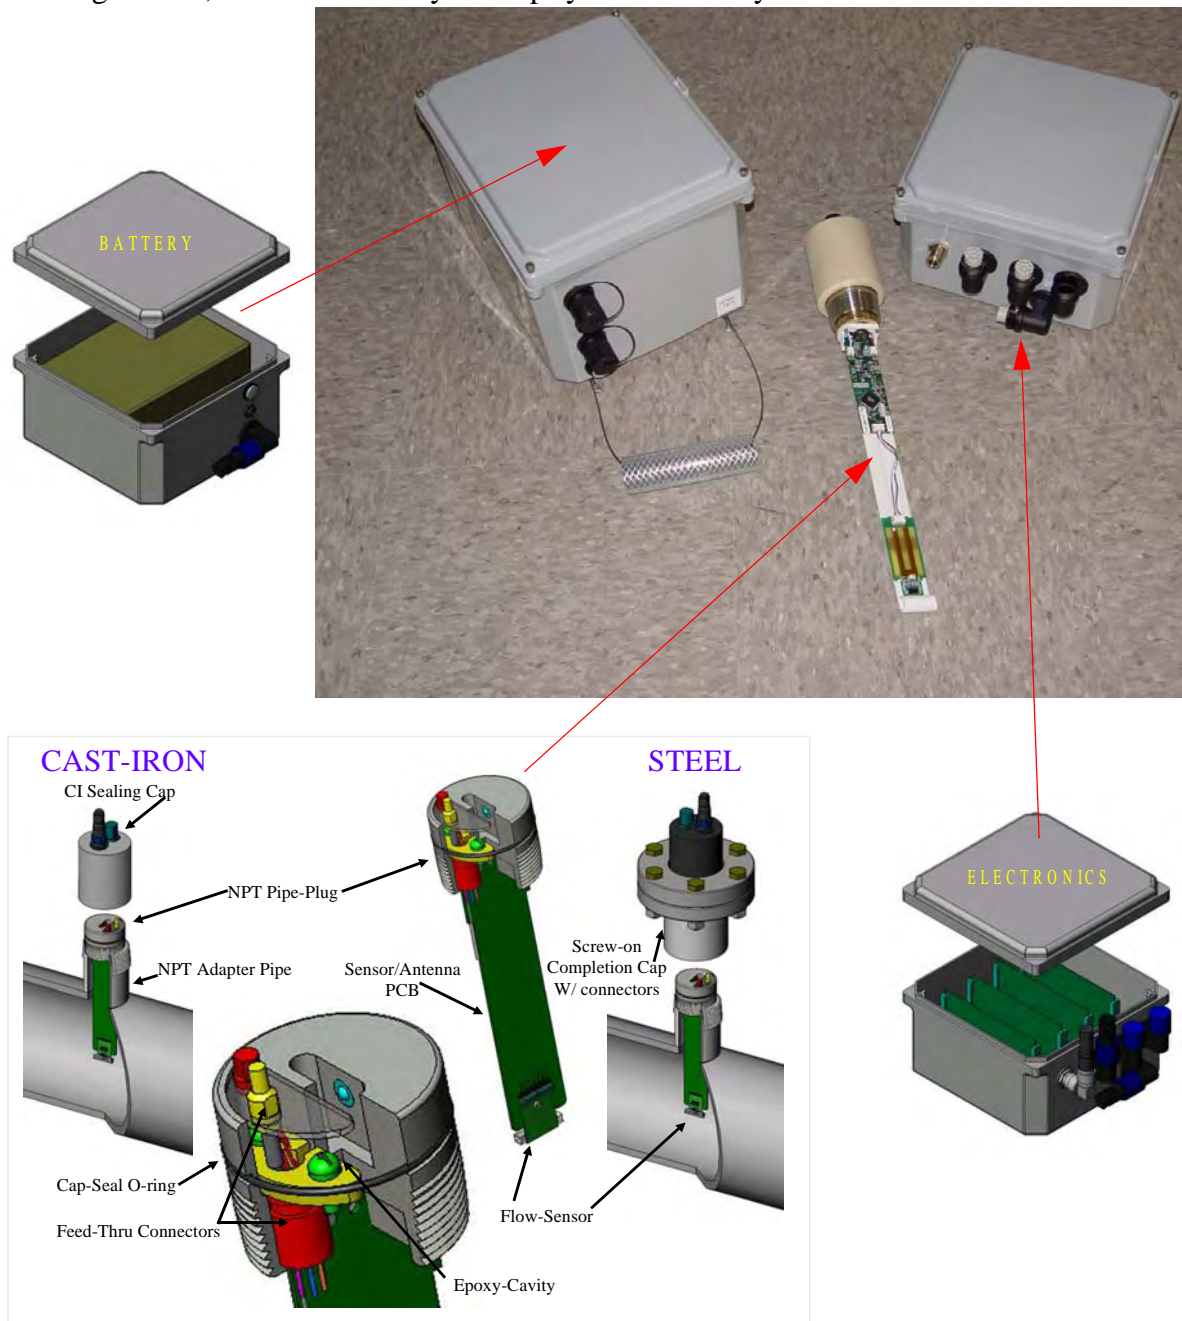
GasNet*TM System Overview and as-built ready-to-ship assembly
